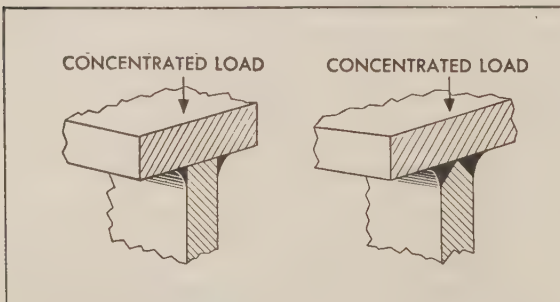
JOINT BETWEEN HEAVY FLANGE AND WEB, SHOWING MACHINED EDGE AT LEFT AND FULL WELD AT RIGHT
